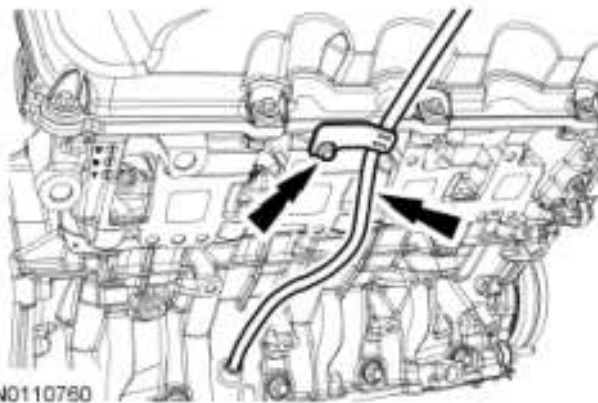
Locating Bolt And Oil Level Indicator Tube
